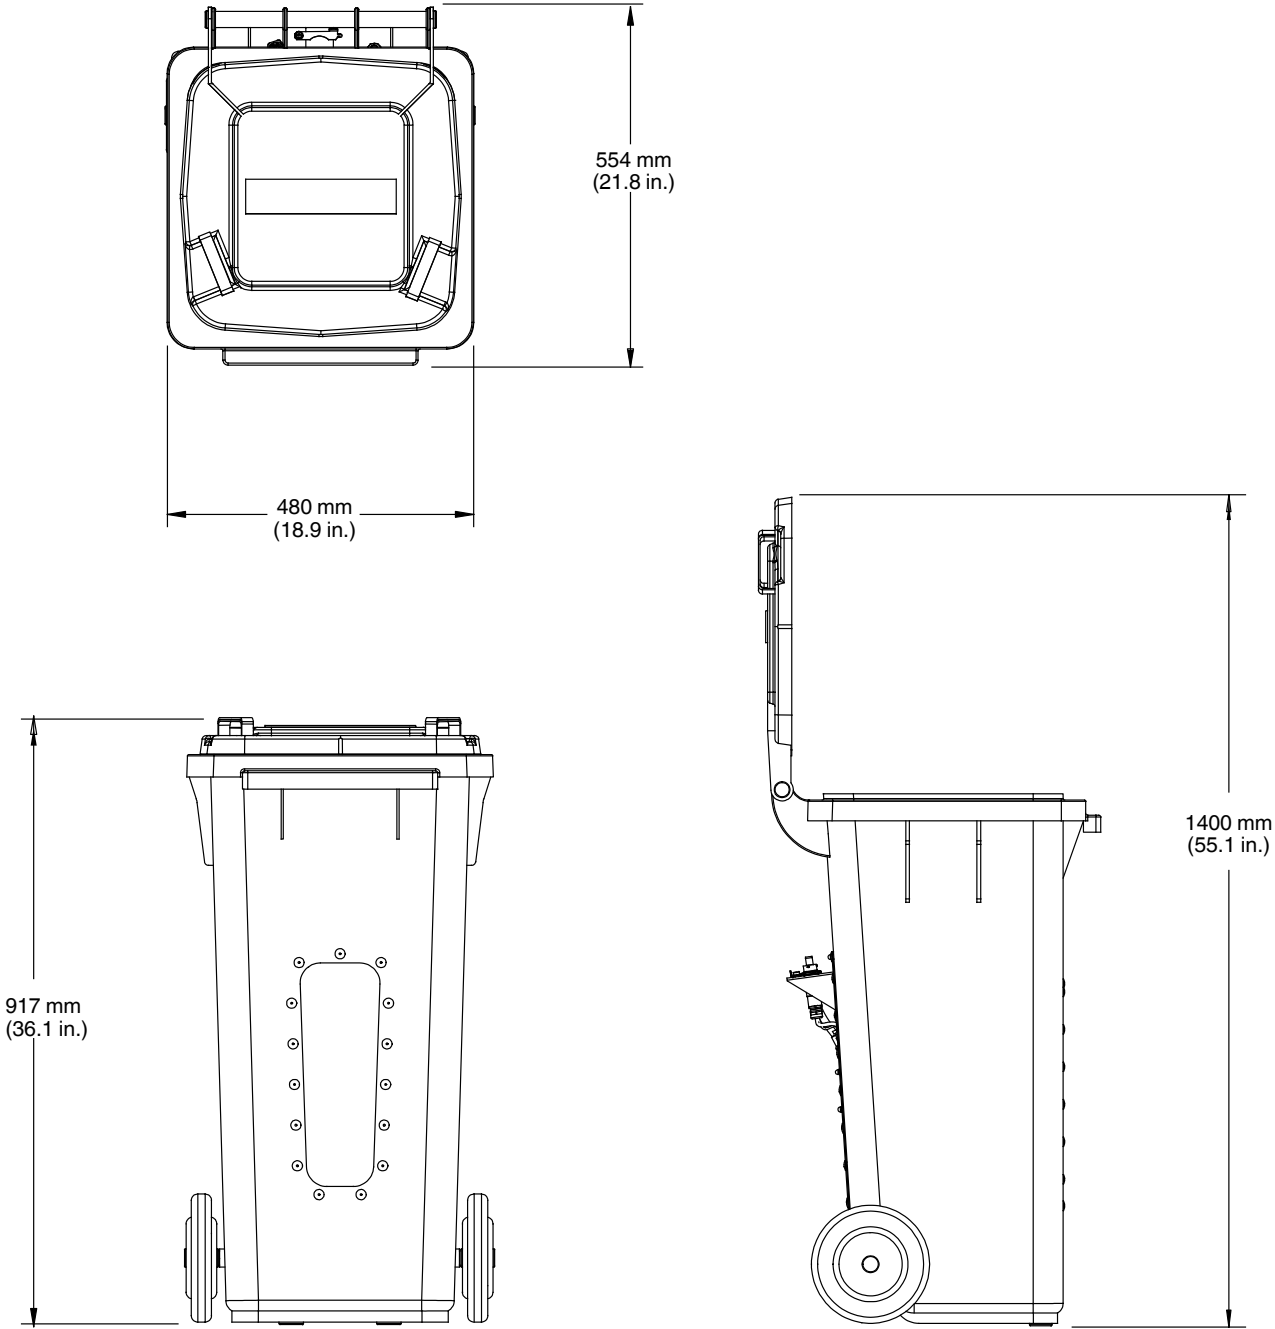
Single-feed adhesive storage bin dimensions and clearances
